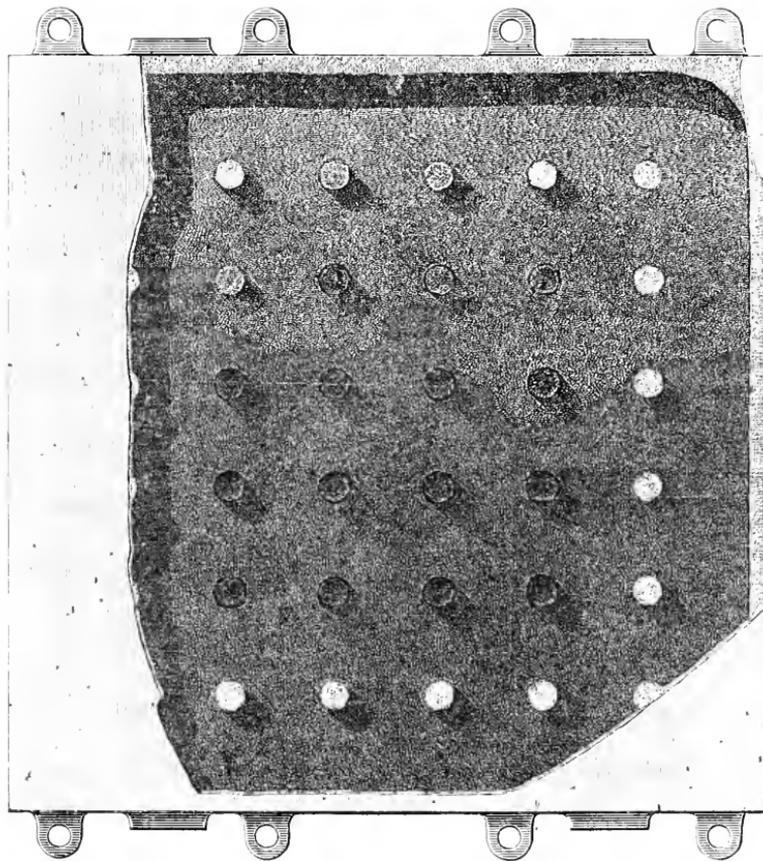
APPEARANCE OF EXPLODED PLATE.
